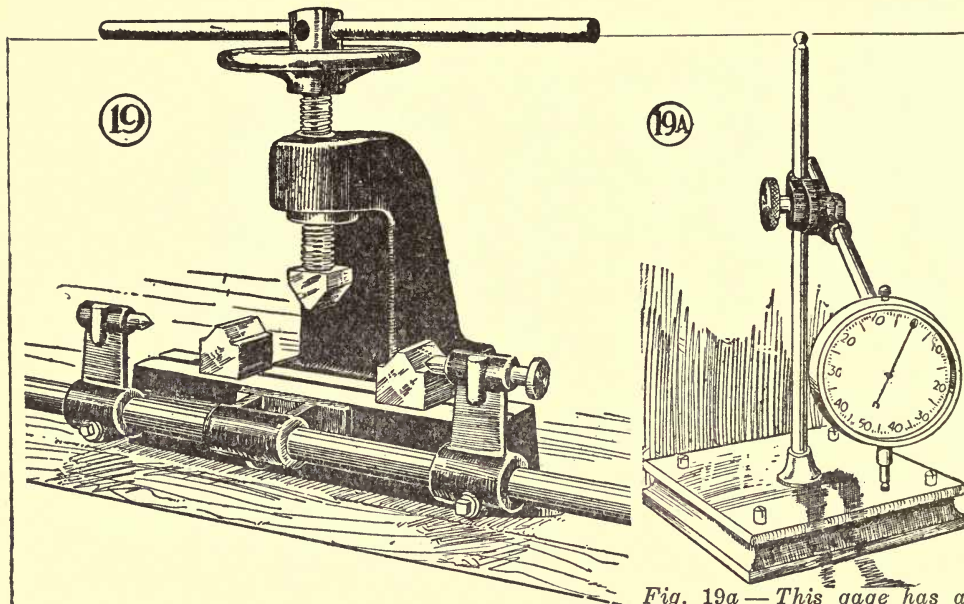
Crankshaft straightening press and testing machine. The shaft is caught between the centers and tested with the gage shown in the figure to the right
